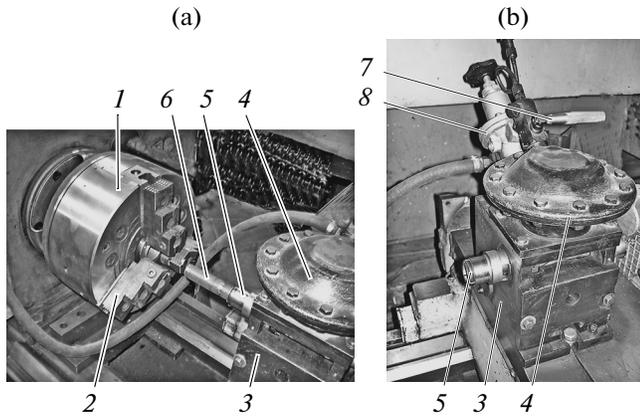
Tool assembly (a) and device for the pipe blank feeding (b): (1) automatic chuck; (2) jaws with deformation and cutting tools; (3) housing of supply device; (4) pneumatic chamber; (5) clamping bush; (6) pipe blank; (7) valve supplying air to the pneumatic chamber; (8) pressure regulator.
